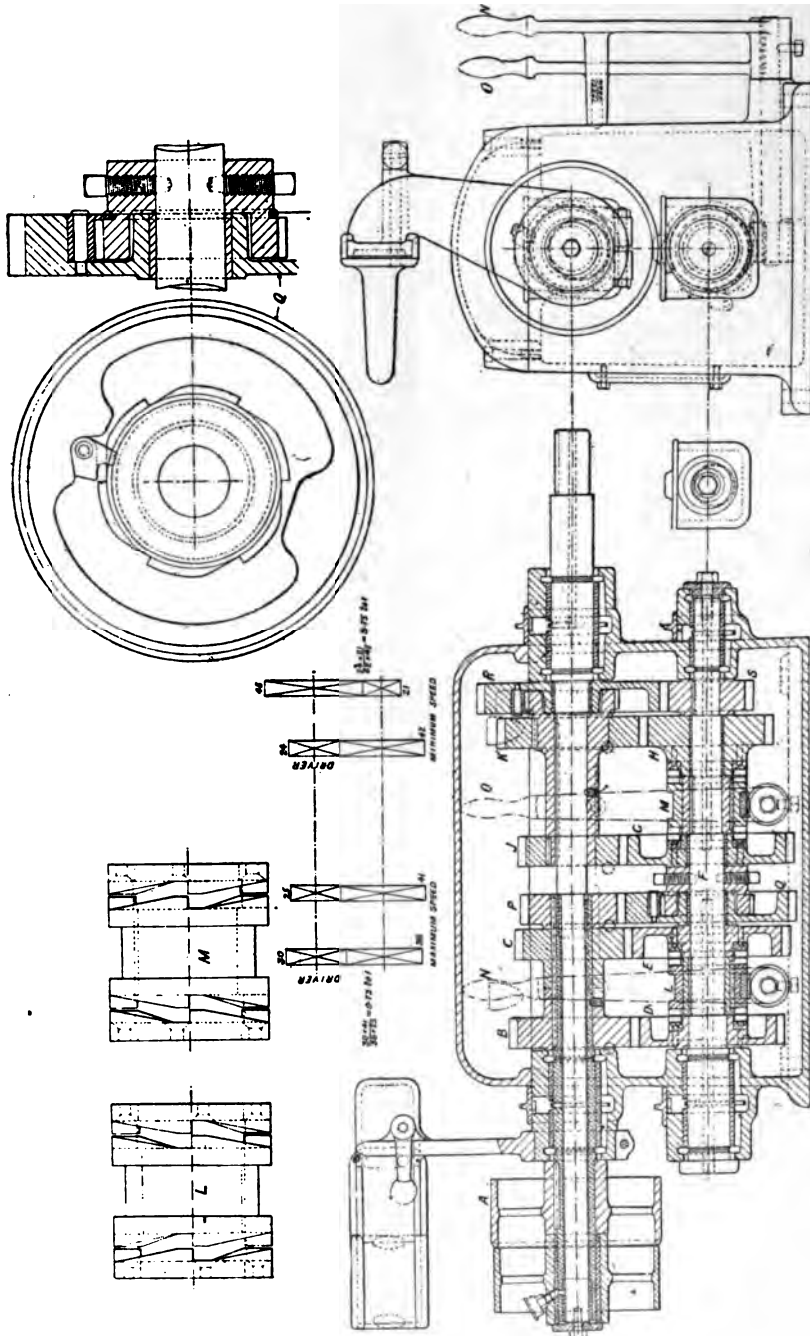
Gear Box, Radial Drilling Machine. (John Stirk & Sons, Ltd.)
